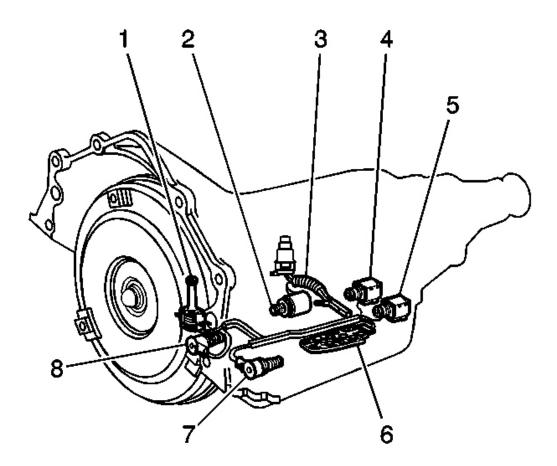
Identifying Valve Body Electrical Components Courtesy of GENERAL MOTORS CORP.
